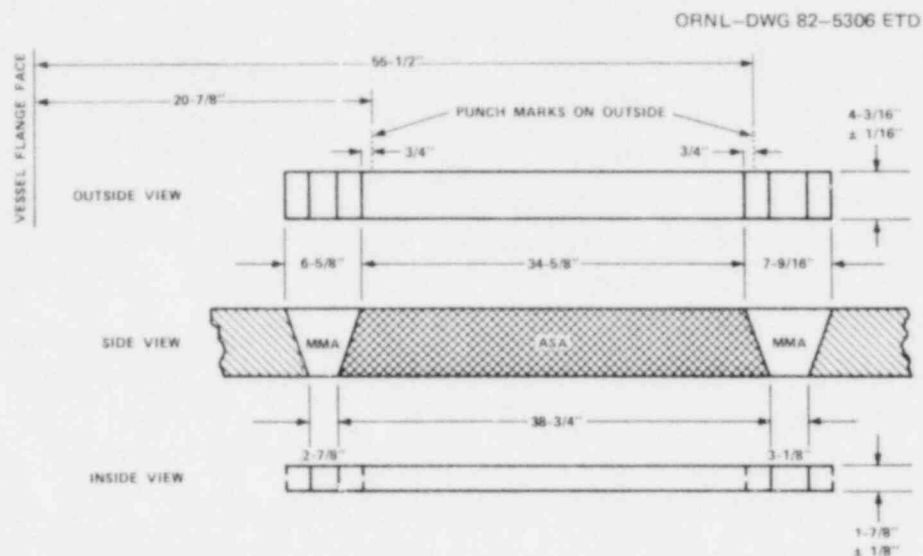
Dimensions at the Seam Test Weld of the Vessel
